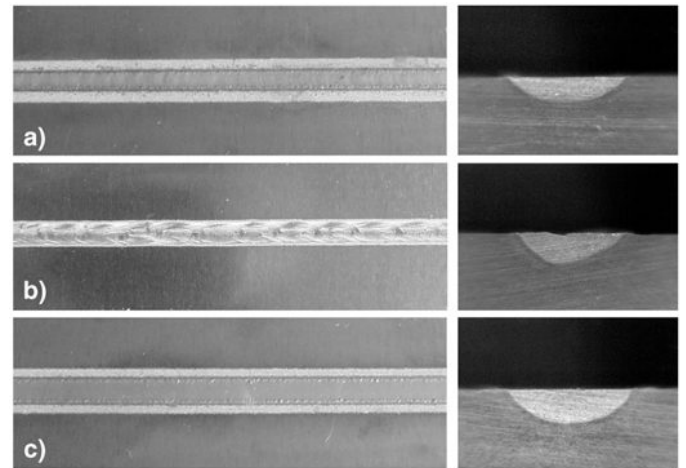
Upper seam sides and fusion penetration in the plasma welding of AlMg₃, t=3mm, no filler metal
